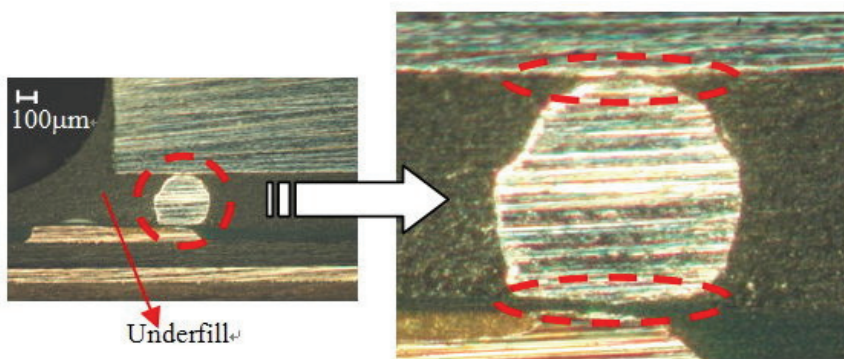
Thermal fatigue fracture of a solder ball
